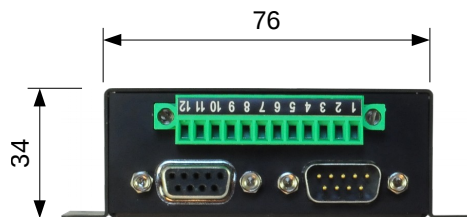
Dimensions and connection clearance of mini Daqu – Front View.
